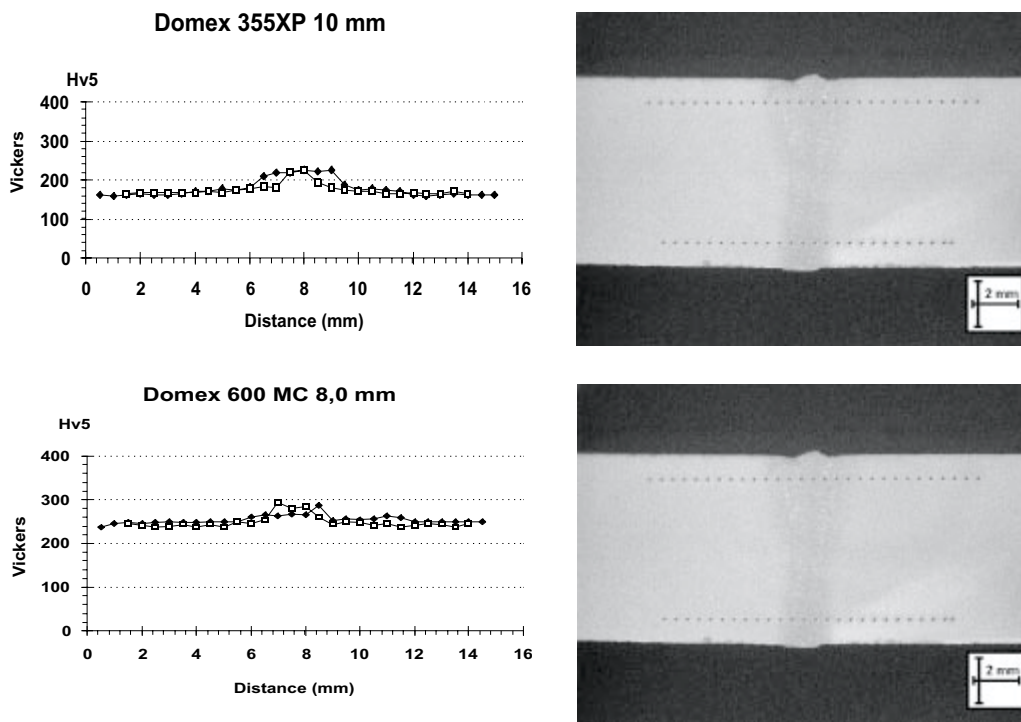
Hardness and weld appearance for Domex 355 XP and Domex 600MC, autogenous welding, laser cut edges.
